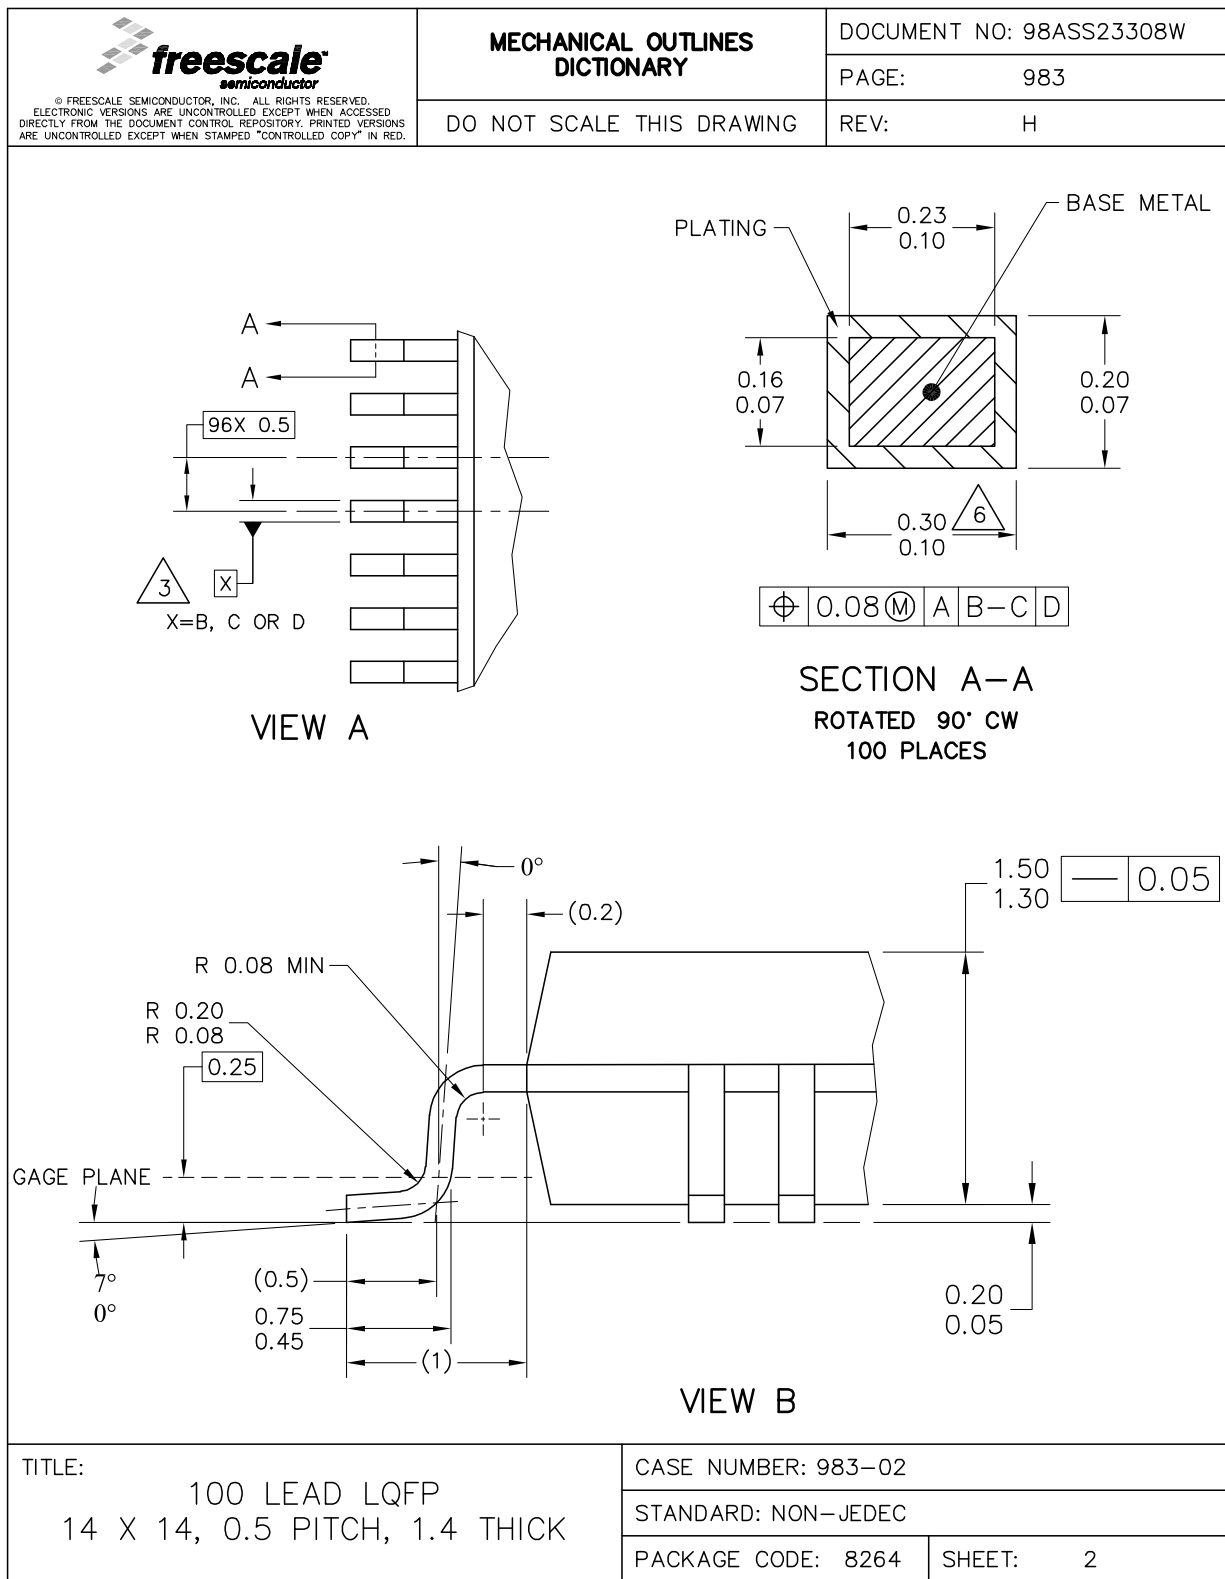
100 LQFP package mechanical drawing (2 of 3)
